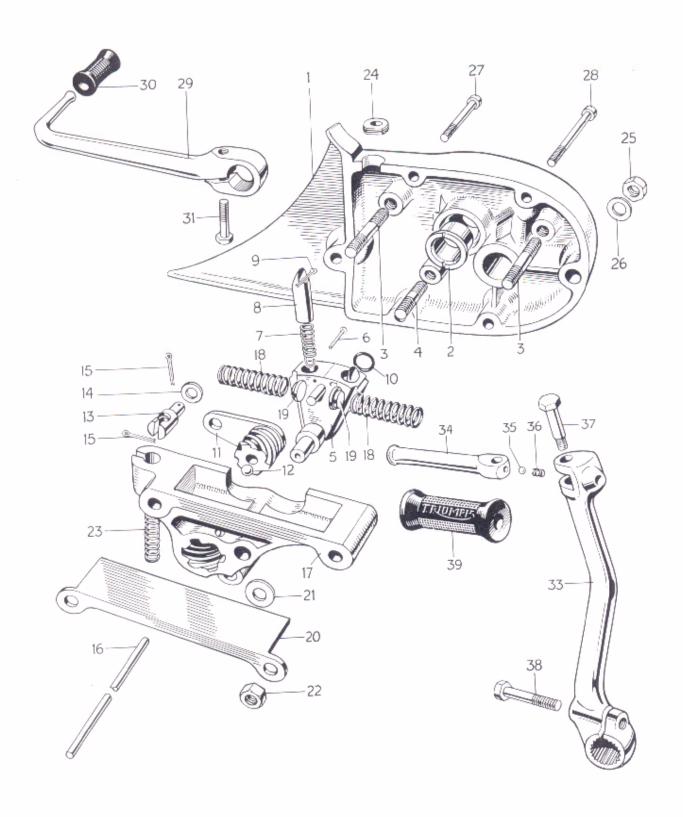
GEARBOX OUTER COVER AND LEVERS.
